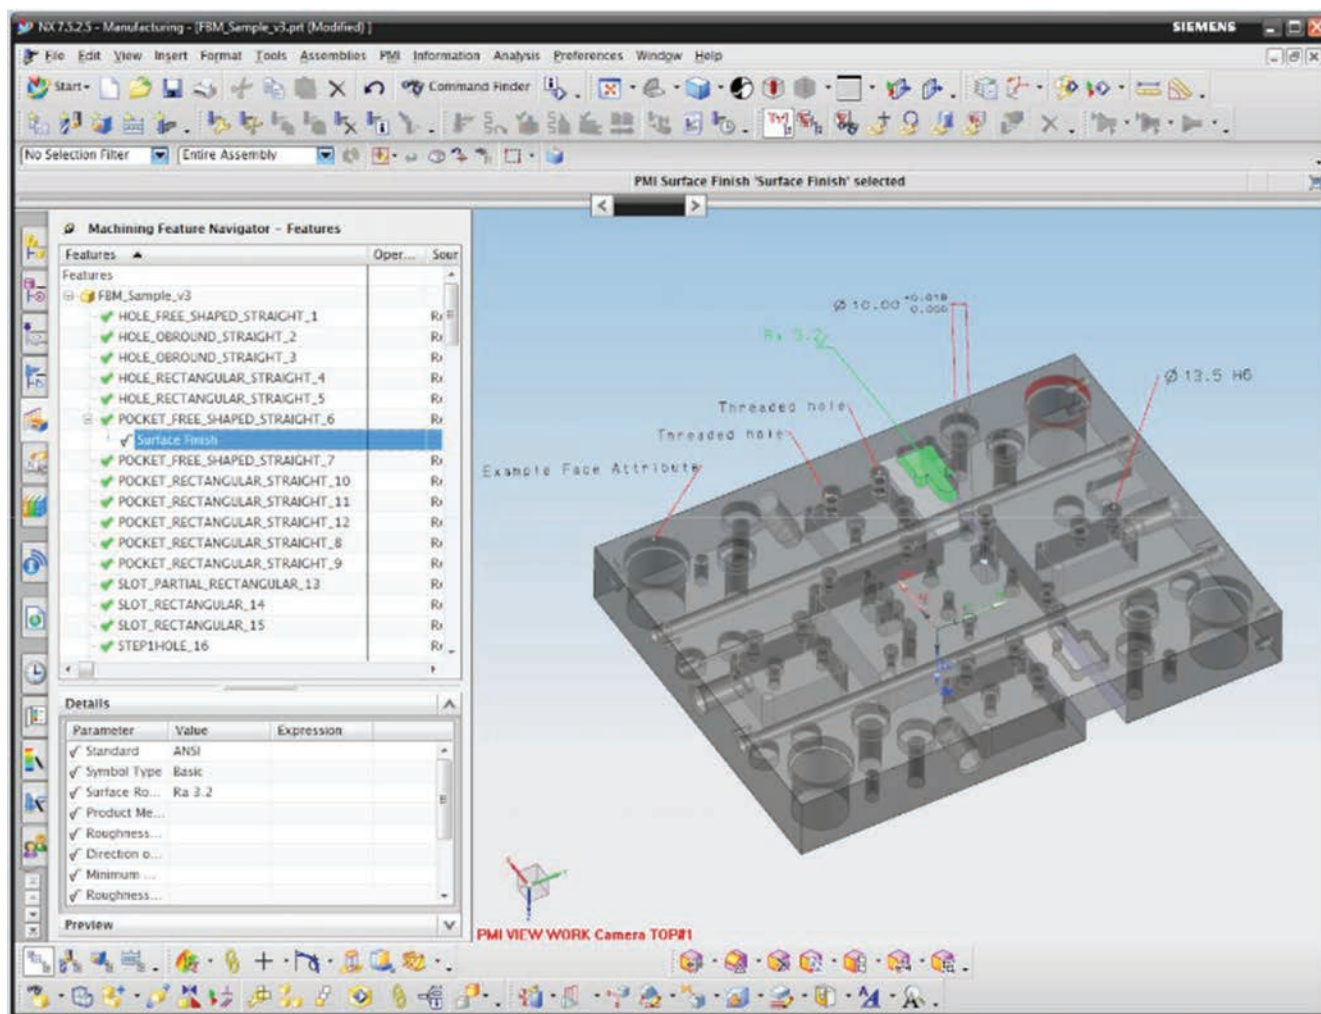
Recognition of geometrical features of the workpiece (mold bases) in NX CAM program [6]
